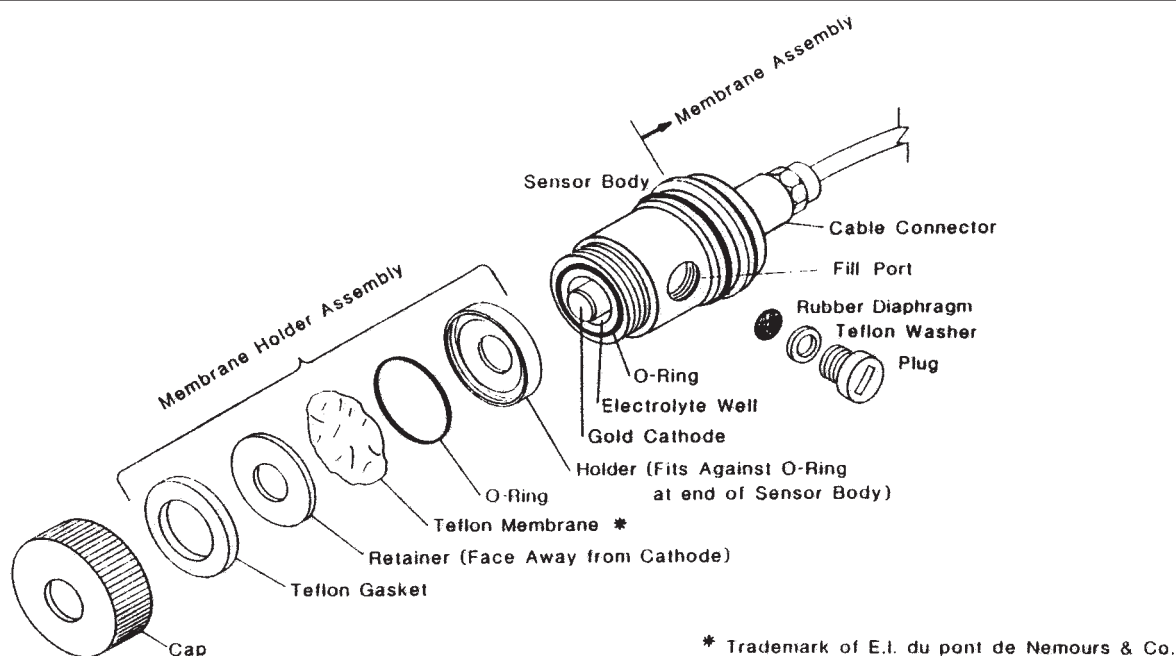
Exploded View of Sensor/Membrane Assembly
